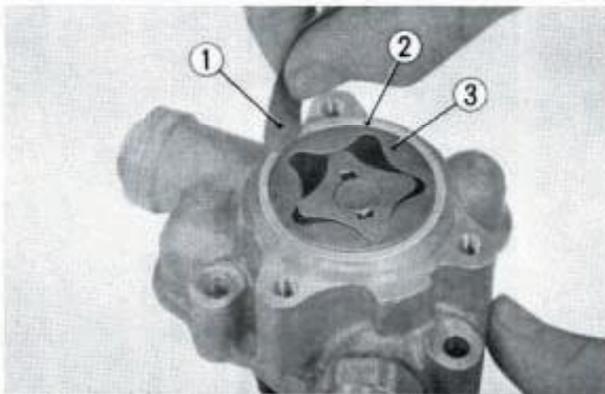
① Feeler gauge ② Pump body ③ Outer rotor
